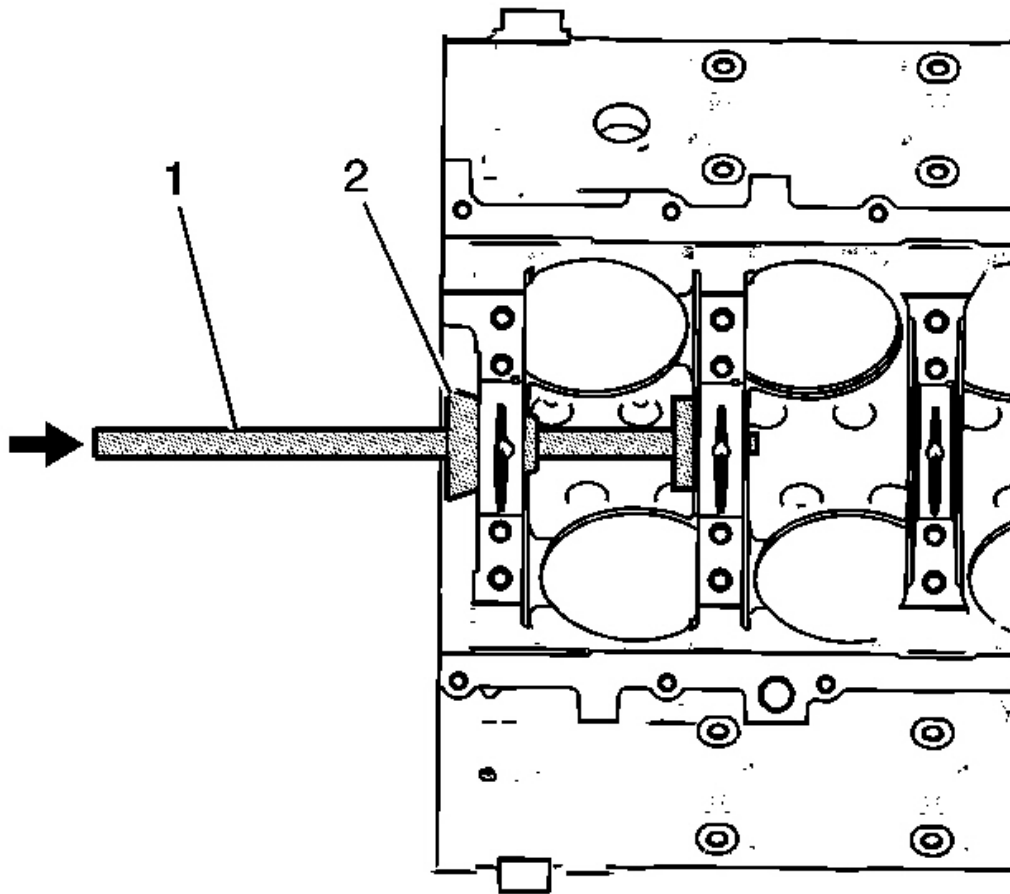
Driving Bearing Out Of Or Into Engine Block
